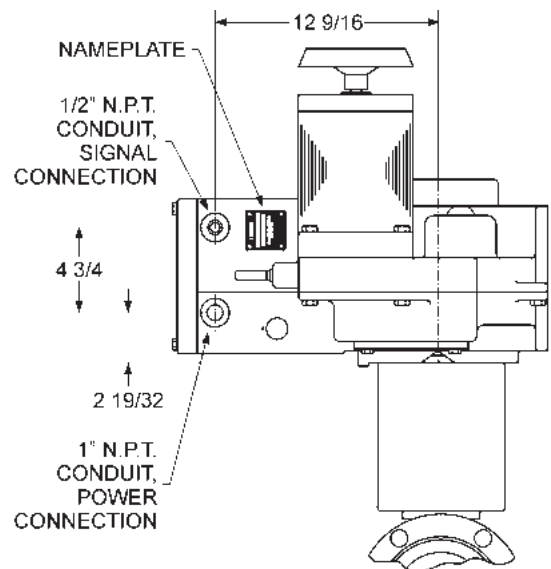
Model 11-460 Outline Dimension Drawings
